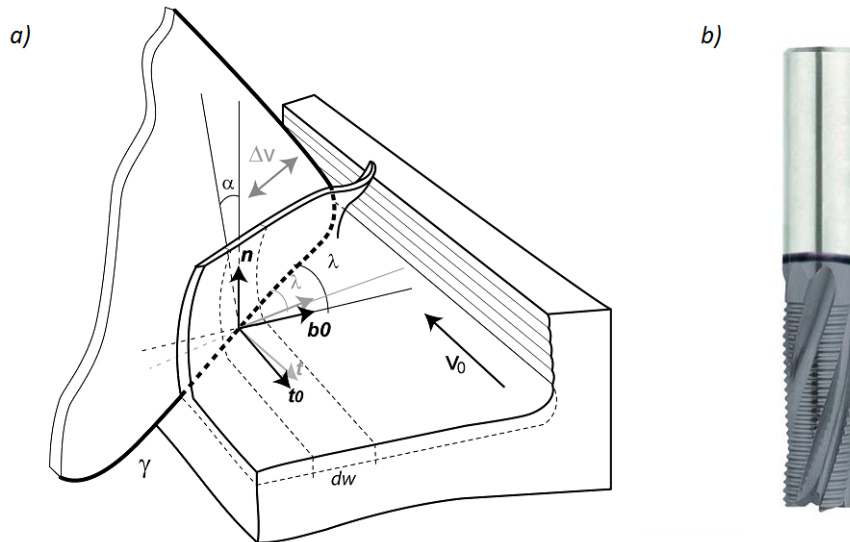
a) Local force basis on the cutting edge element, b) serrated milling tool
